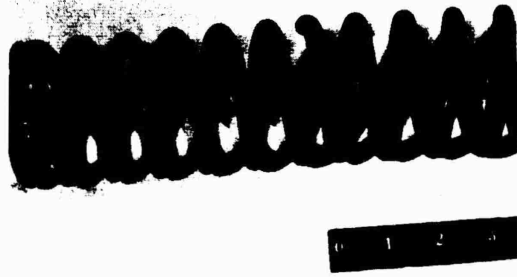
Broken Left Rear Overload Spring on M151A1C after 6872 Test Miles.
